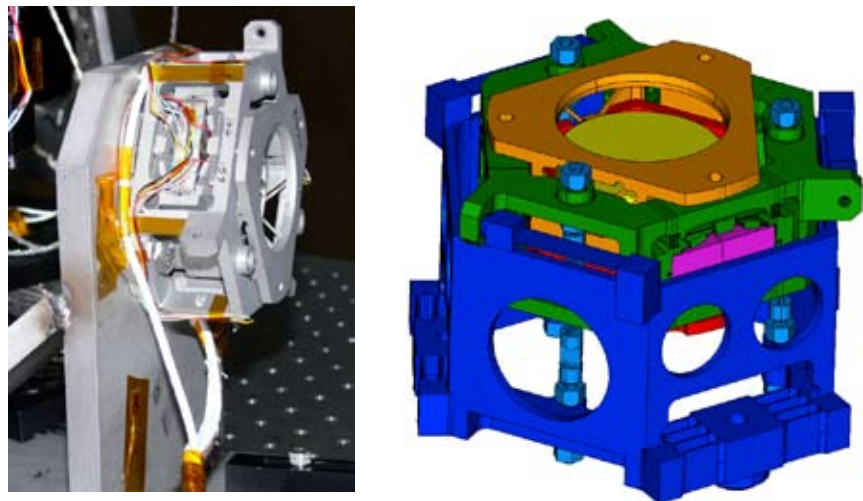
The fine-steering mirror actuator, shown in this CAD drawing in its flight mount, has been built as a brassboard (Figure 20-3, inset F) and will be flight-qualified in 2009.
